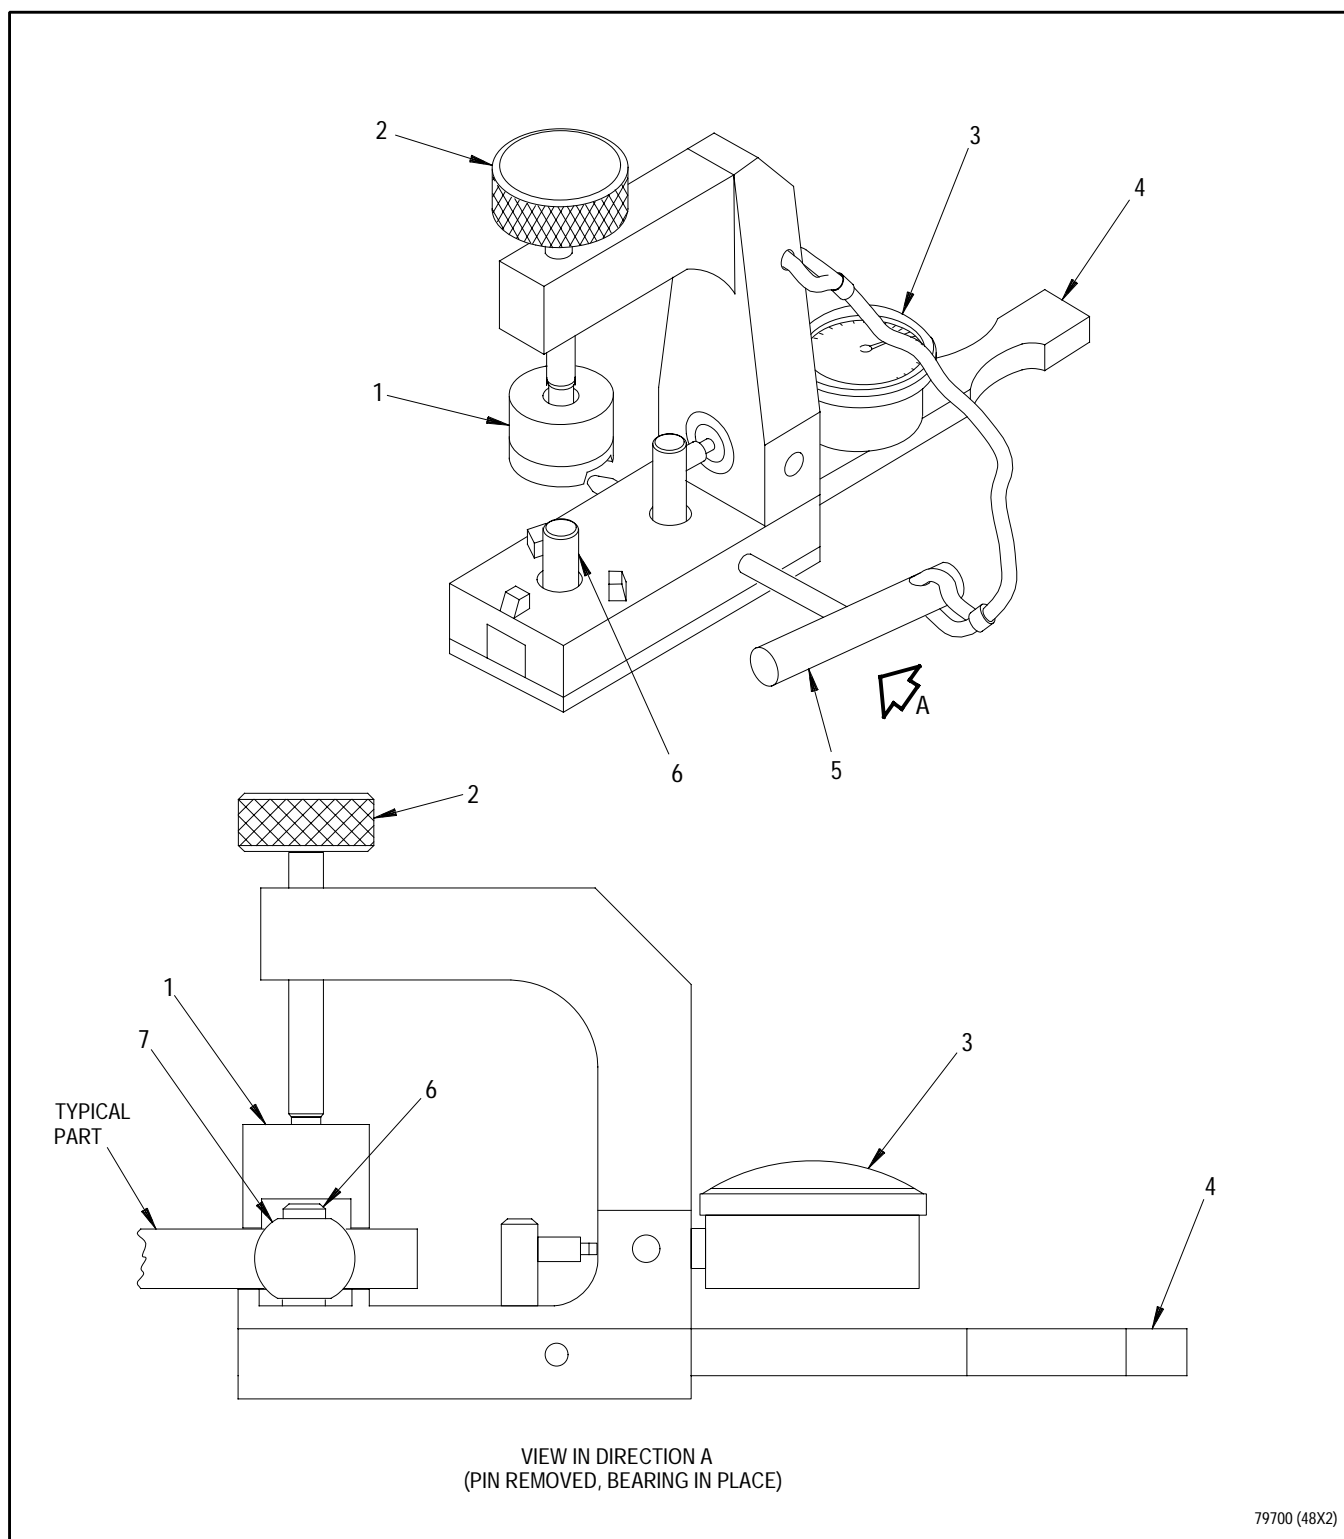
Uniball Radial Wear Measuring Gage - Typical
